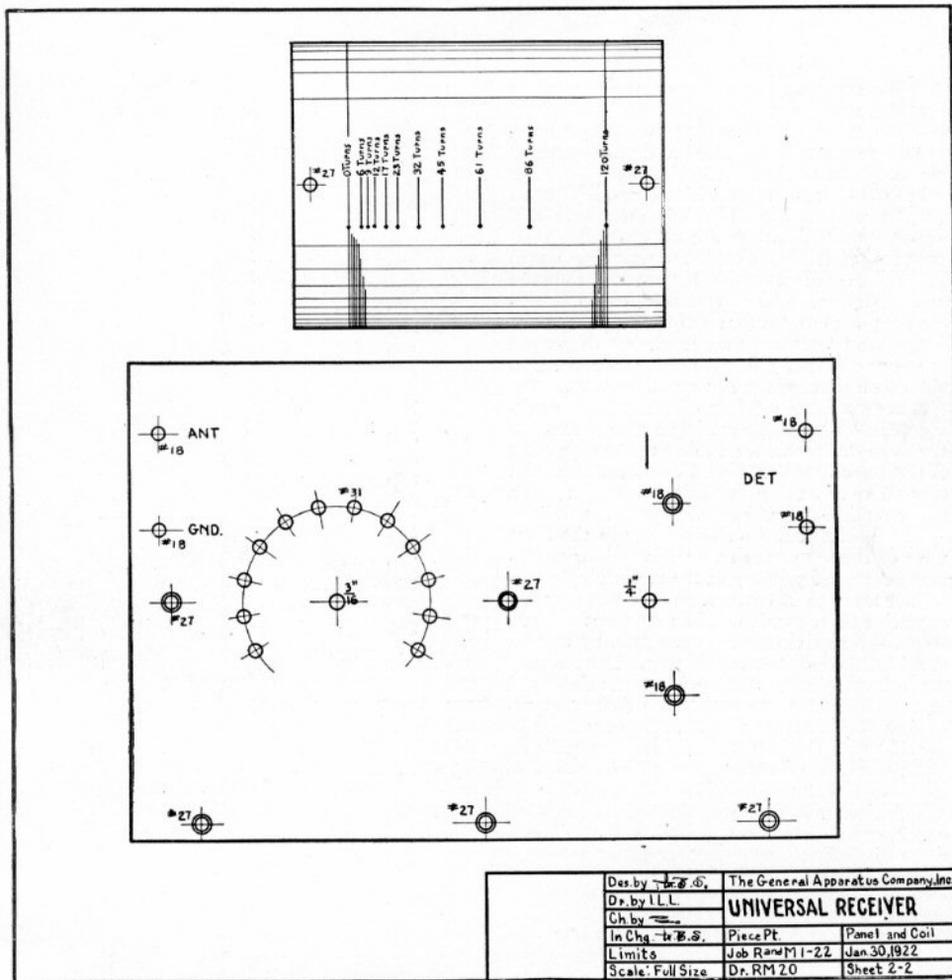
Scale drawing of coil details and panel lay-out, reduced to one half size
